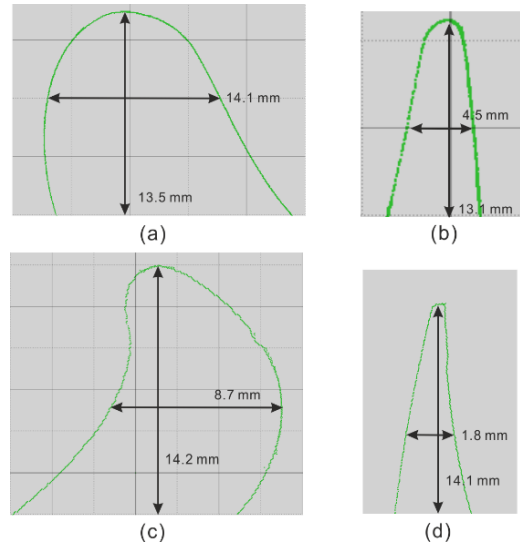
Measurement of edges of a turbine blade and a compressor blade
